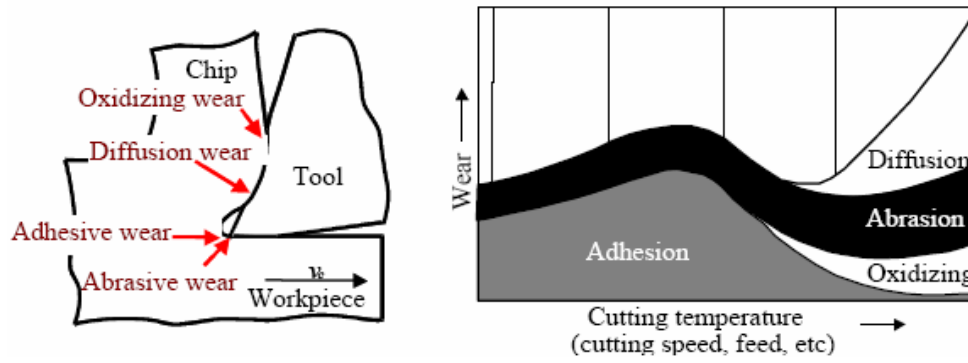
Different tool wear mechanisms in metal cutting [47]
